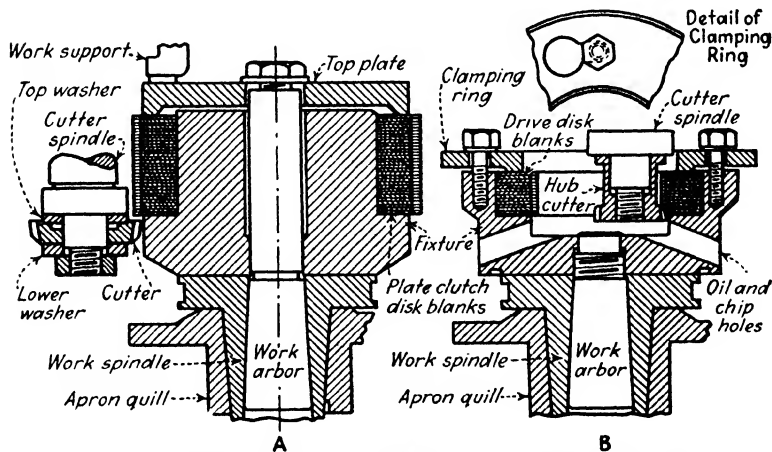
Holding outer clutch disks at A and inner disks at B.
